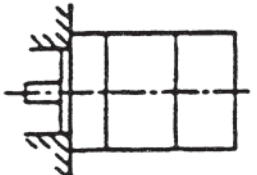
Outline drawing of NEMA Type P flange mounting. (From Refs. 2 and 5.)
